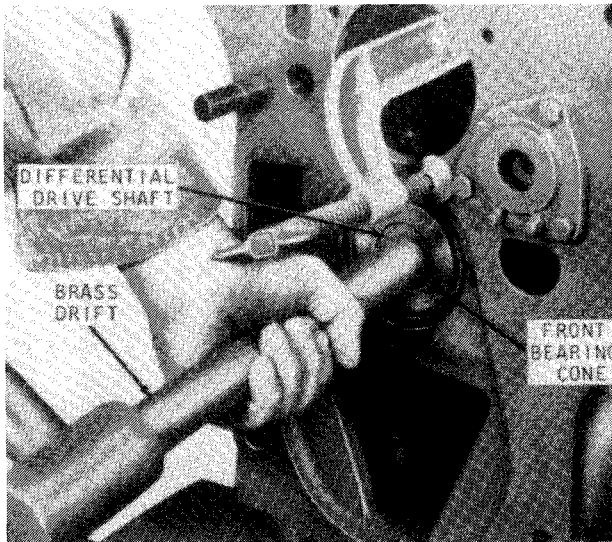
Install a “C” clamp to hold front gear forward while driving differential drive shaft out of front bearing cone.
